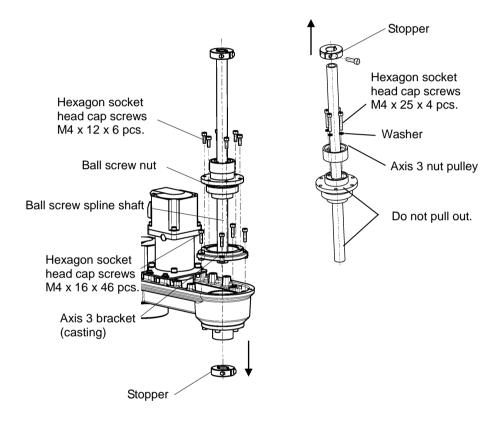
Dismounting ball screw spline unit (KHL-300, KHL-400)
